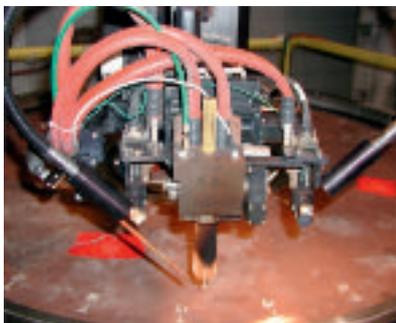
A narrow gap torch mounted on an Arc Machines, Inc. weld head in a Model 2 fixed automation system with remote wire positioning, remote torch tilt and leading and trailing cameras.
